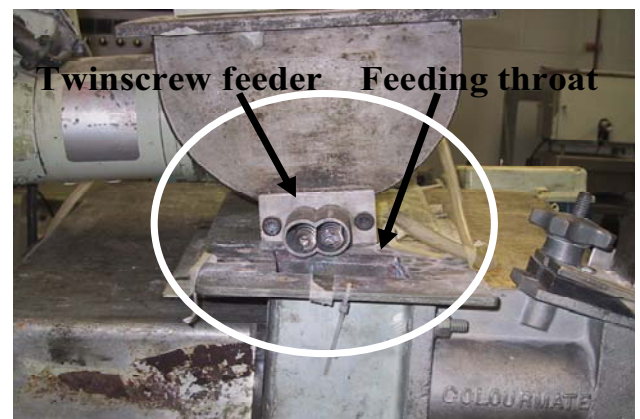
(b) Close-up of the twin screw feeder & feeder port.
